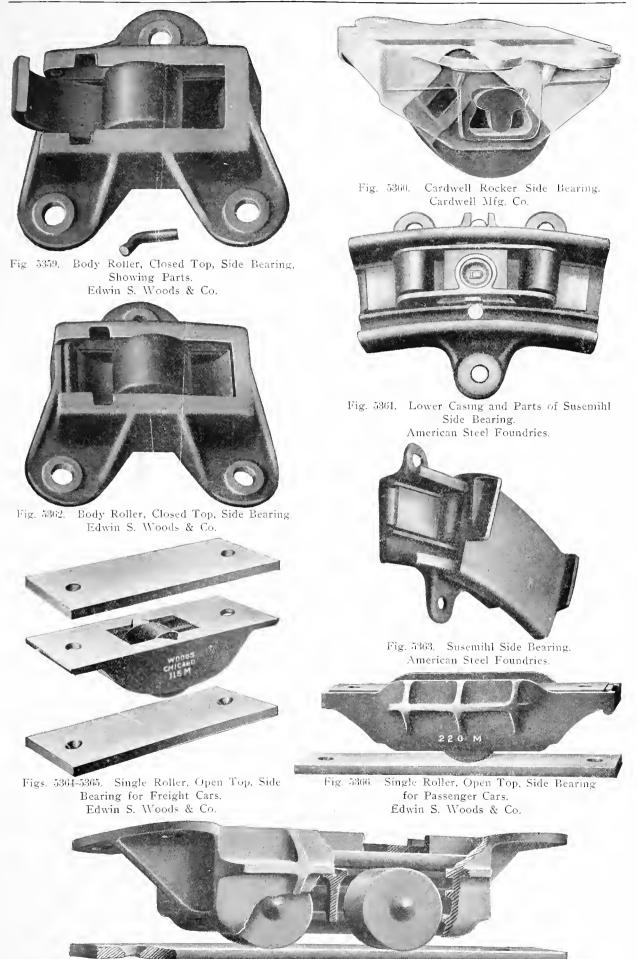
Double Roller, Open Top Side Bearing for Four-Wheel Trucks. Edwin S. Woods & Co.
